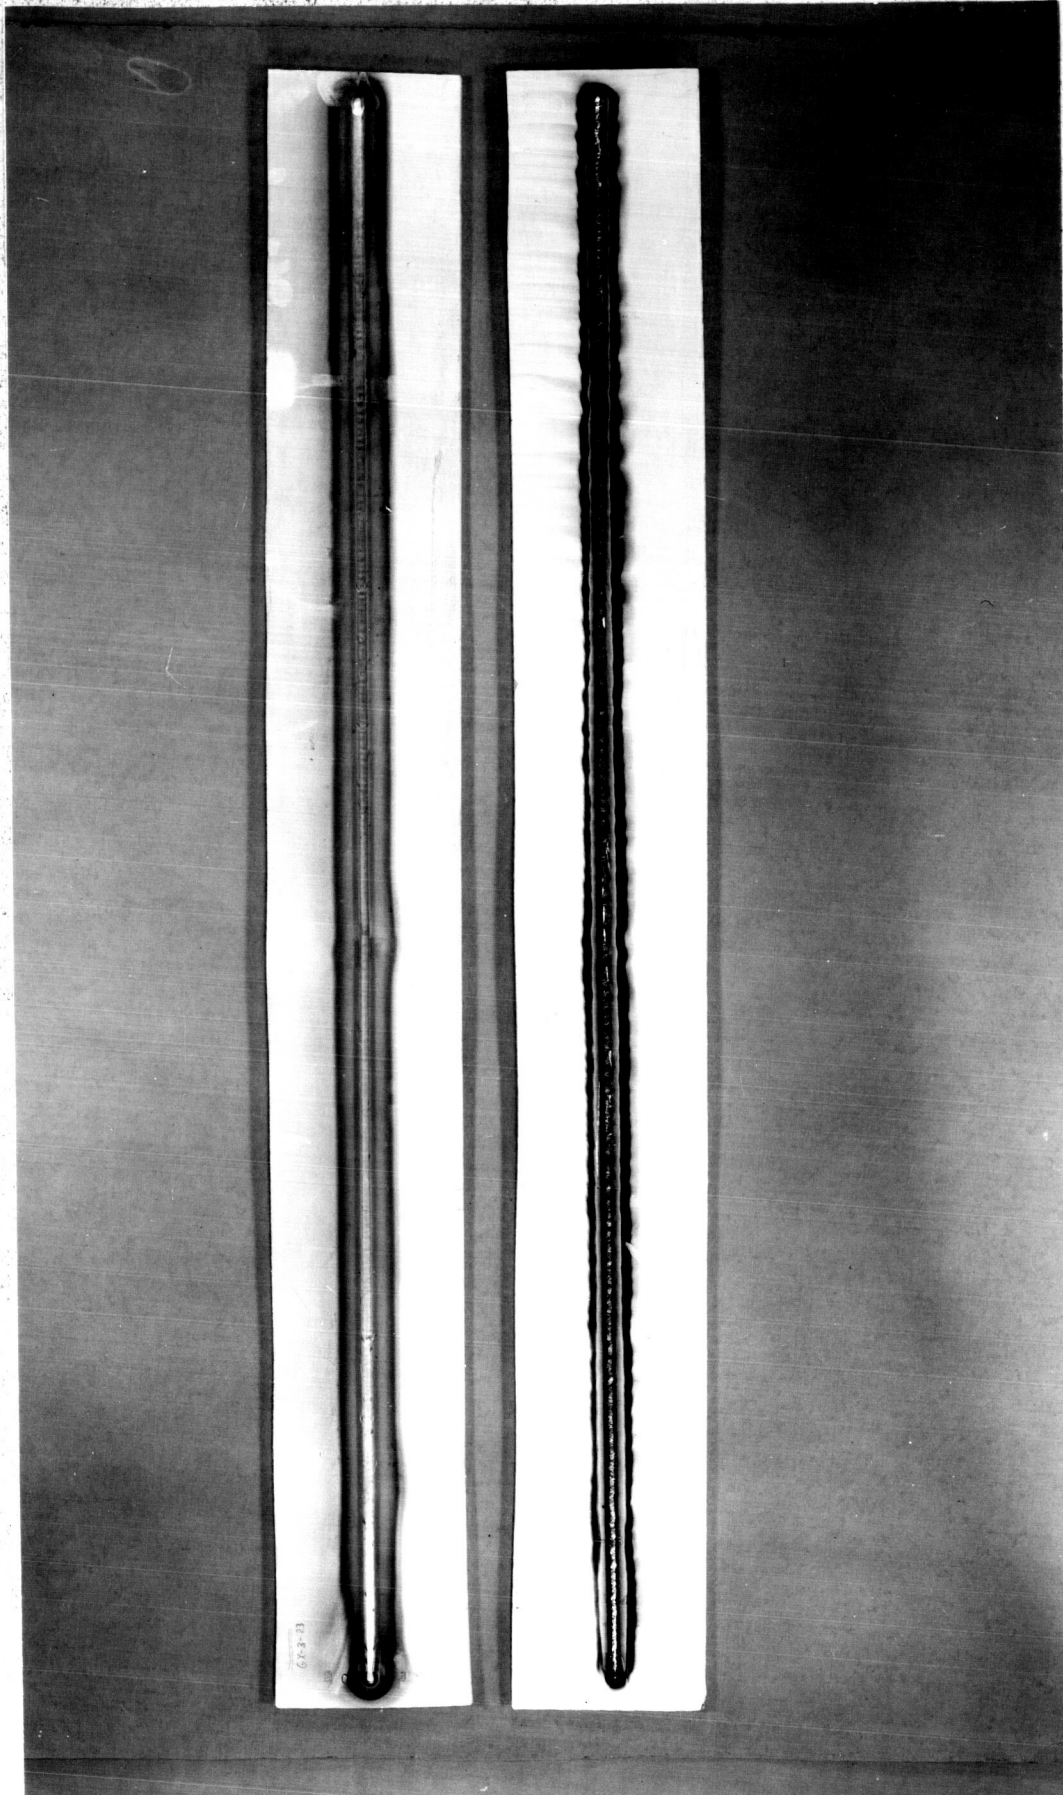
SURFACE OF WELD MADE AT HIGH DEWPOINT
